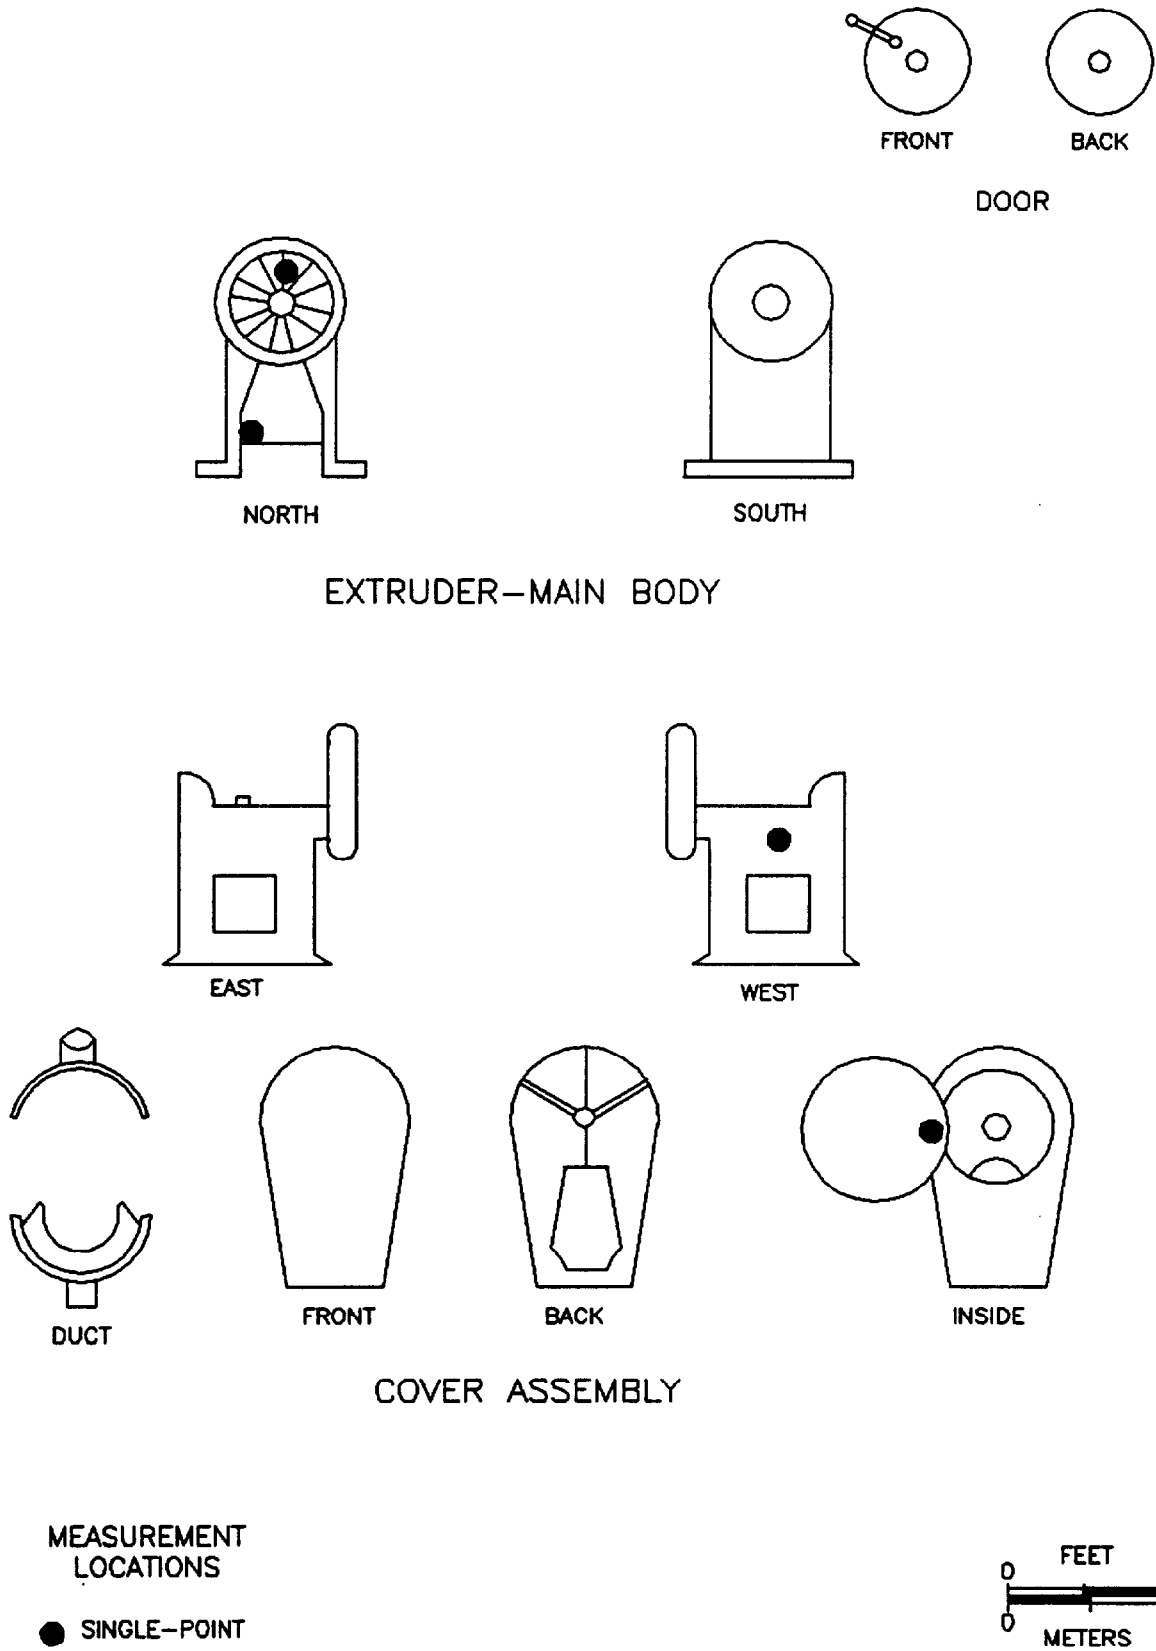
Building 30, Fabrication Room, Extruder #38347 – Measurement Locations
